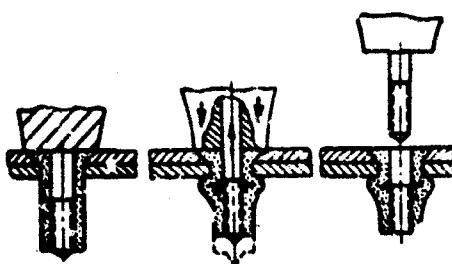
Process of riveting with hollow rivet, equipped with female thread.
